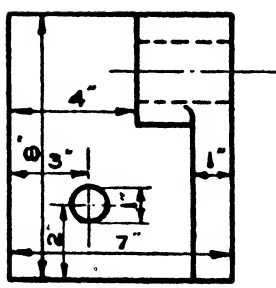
DIMENSIONS WHOLLY WITHIN THE VIEW
